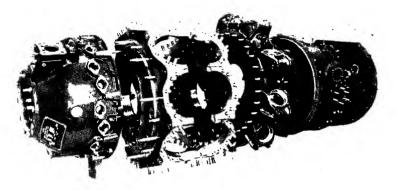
Exploded view of Wright Cyclone engine crankcase sections showing forged aluminum-alloy nose piece, forged main section, cast blower section, and cast rear section.
